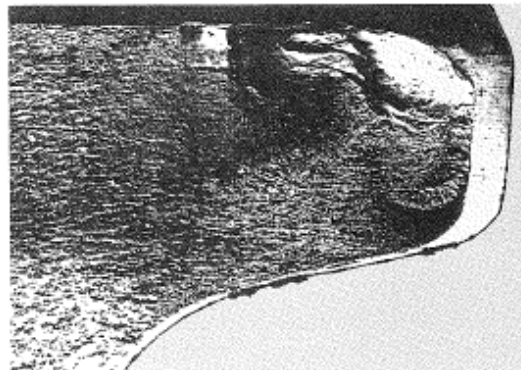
Magnified view of fracture initiation area of the previous illustration.
